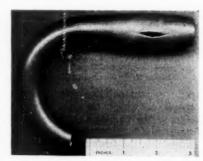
Bursting Test Specimen Showing Failure Occurring in Unbent Section Rather Than in Bent Section.
